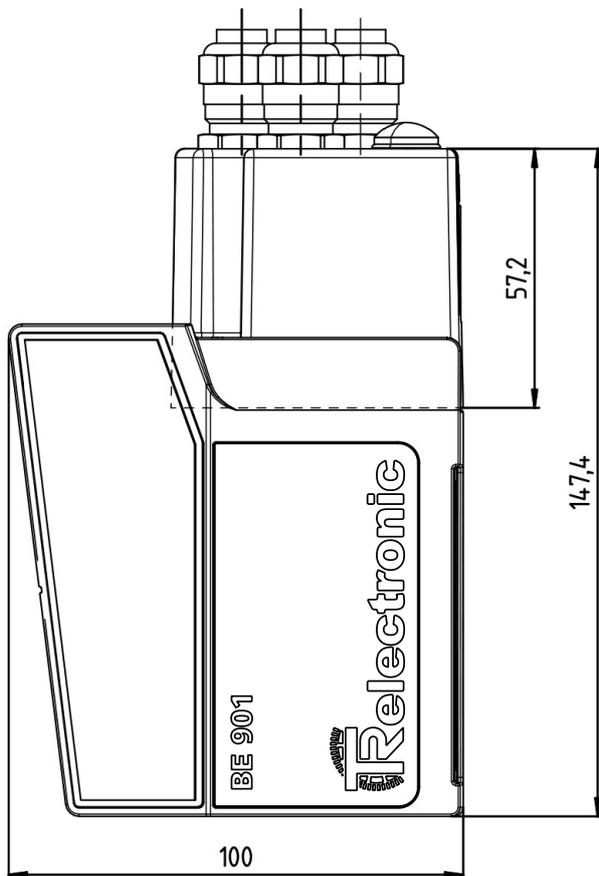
Dimension drawing BE 901 SSI with BE 901 MK SSI connection hood (all dimensions in mm)
